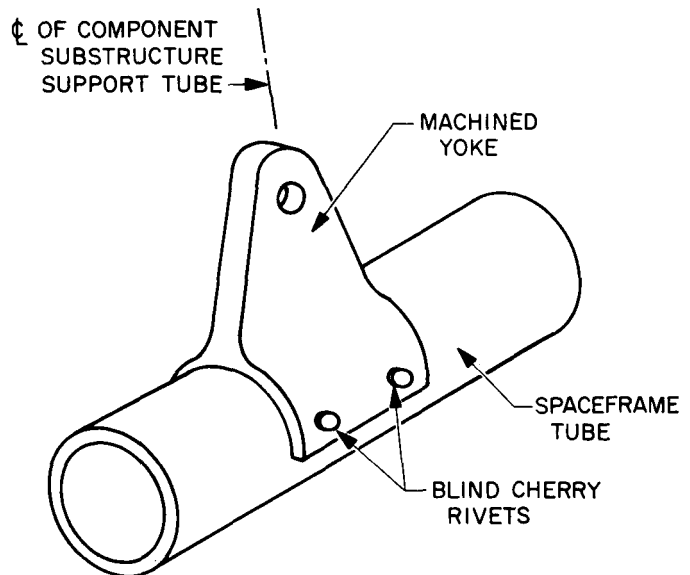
Machined aluminum yoke mounted on spaceframe tube
